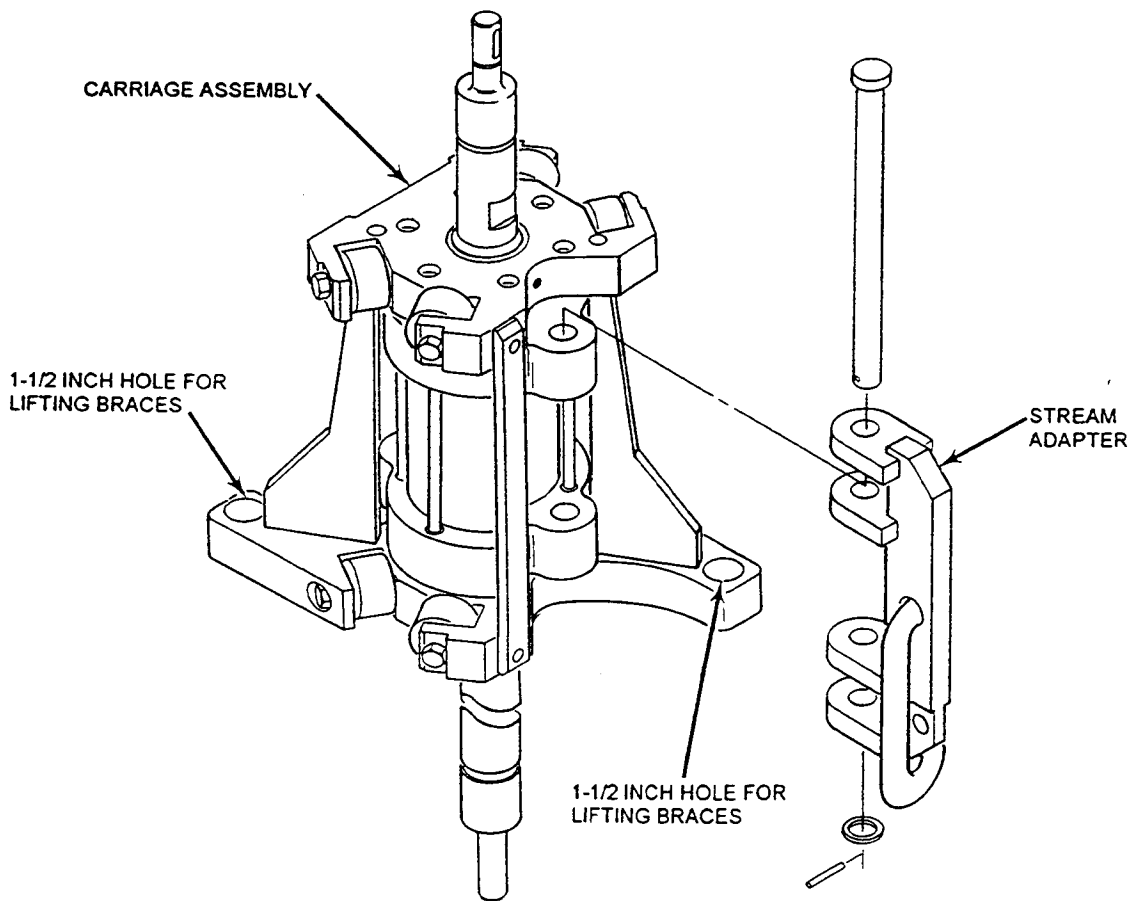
Carriage Assembly Stowage (Model CR-12 Shown)
